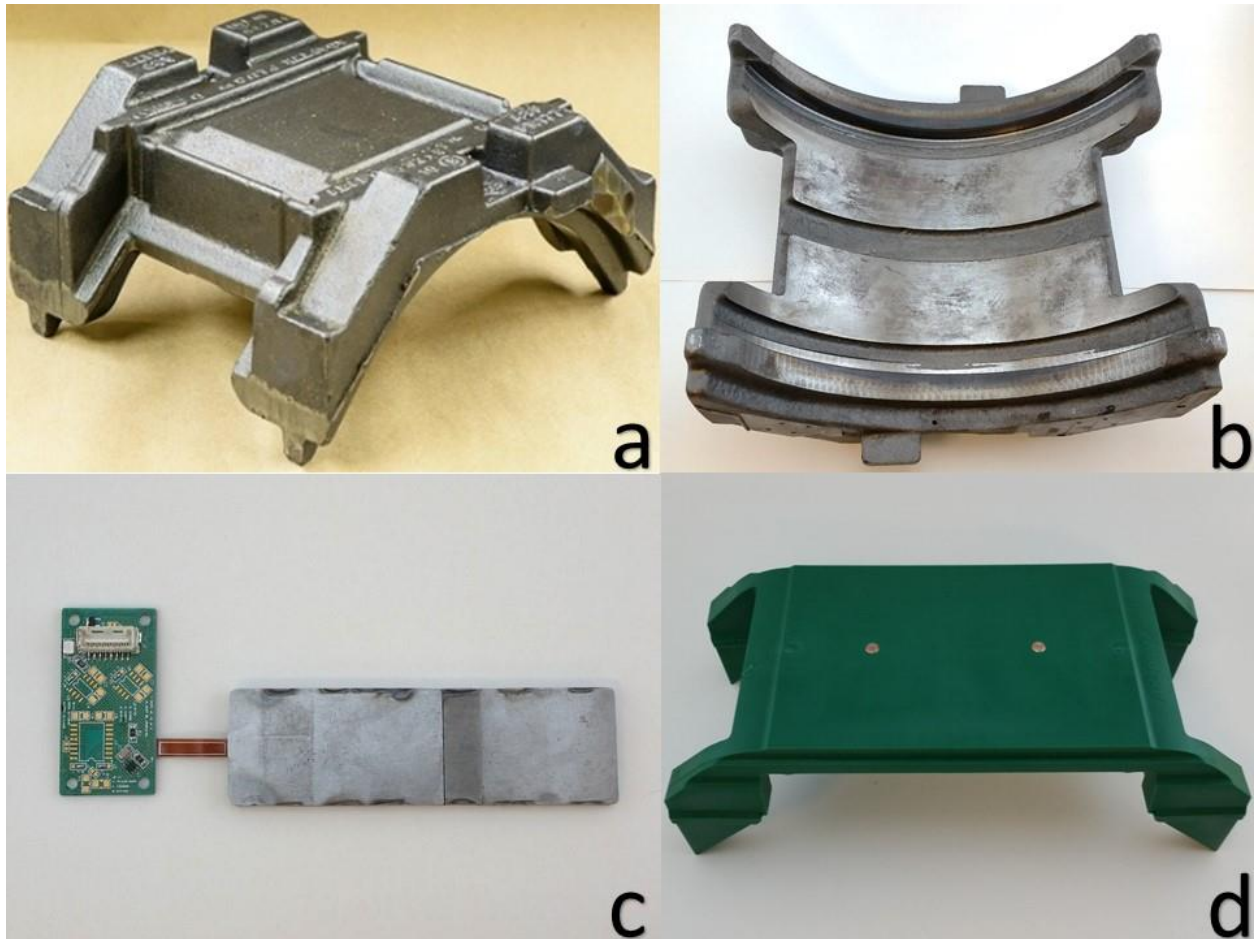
(a) AdapterPlus™ Bearing Adapter, (b) Bottom Side of Bearing Adapter Showing Curved Portion, (c) Smart Insert Prototype, (d) AdapterPlus™ Steering Pad
